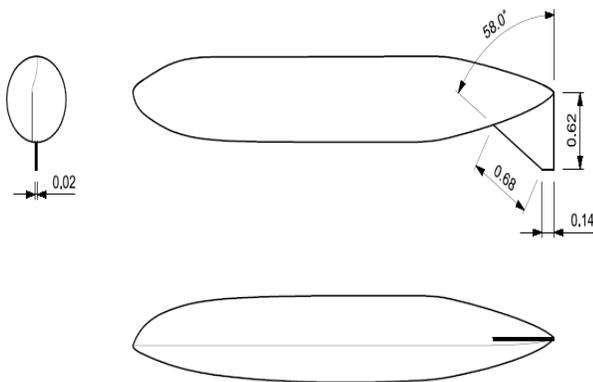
External Tank with Trapezoidal Fin Drawing (Dimensions in meters)
